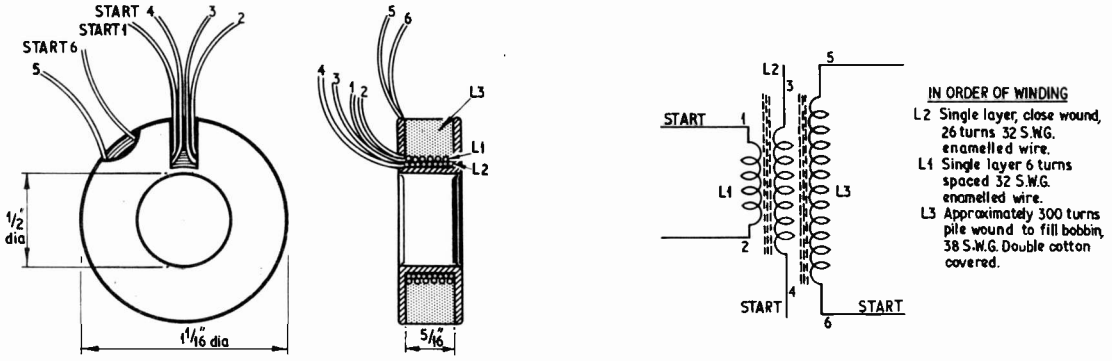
Winding details of coils L1, L2, and L3 in transformer T1 (see text)
